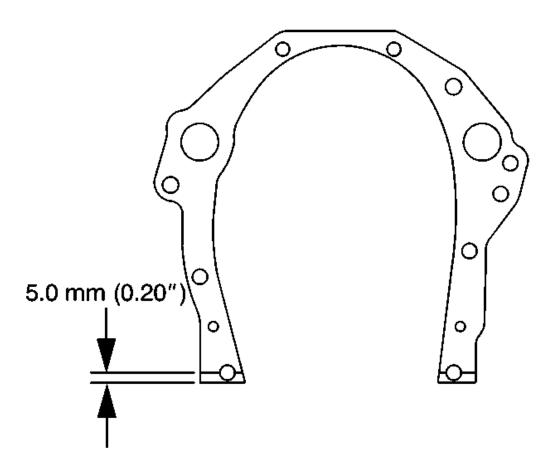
Applying Sealer To Lower Tabs Of Engine Front Cover Gasket Courtesy of GENERAL MOTORS CORP.
